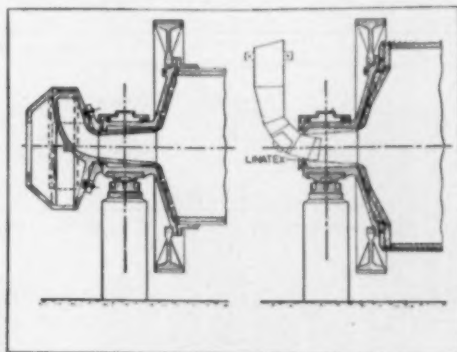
Old arrangement, left, of 5x16-ft tube mill with drum feeder. New arrangement, right, of 6 ft 8 in. x 16 ft pebble mill with hopper feeder.
